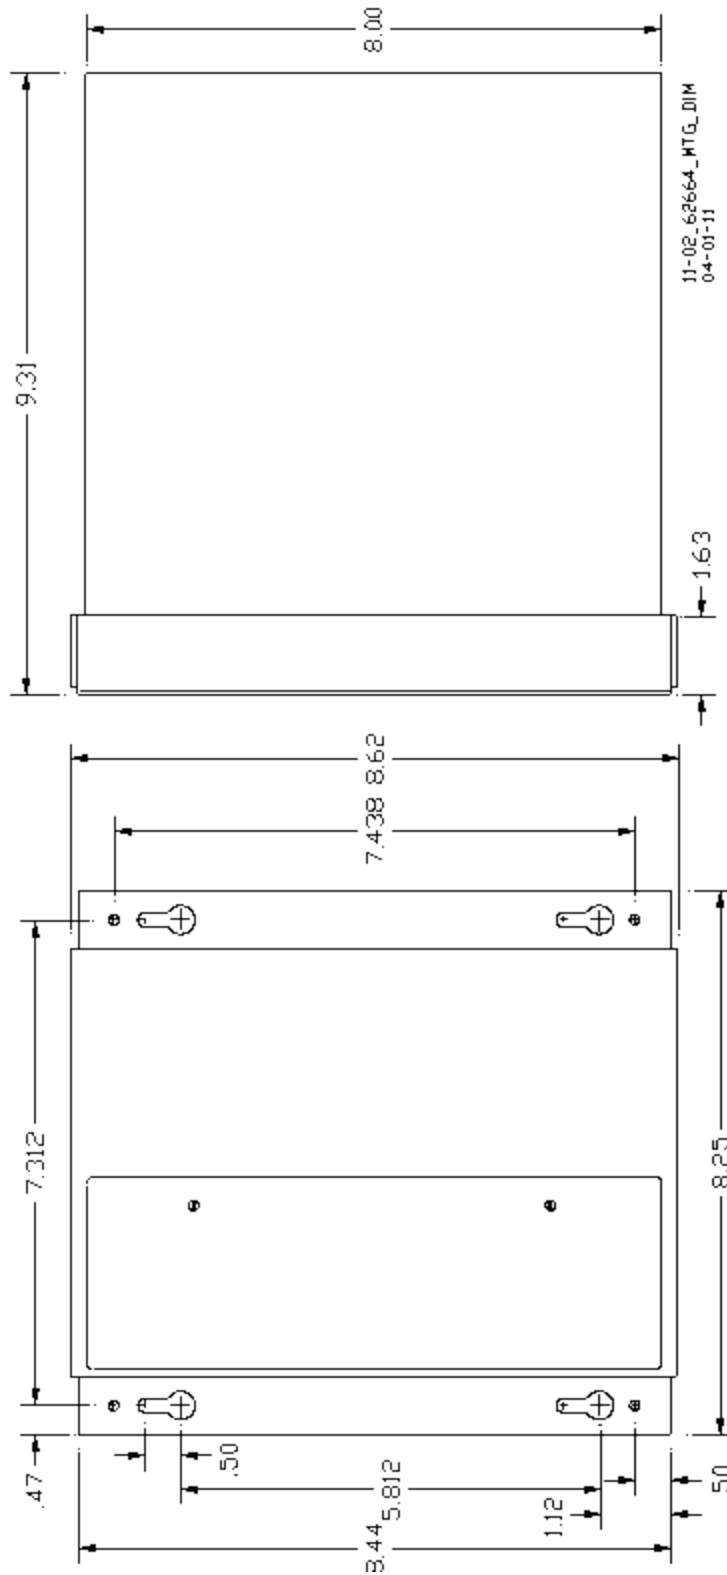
Bidirectional Simulation Coupler Assembly Mounting Dimensions
